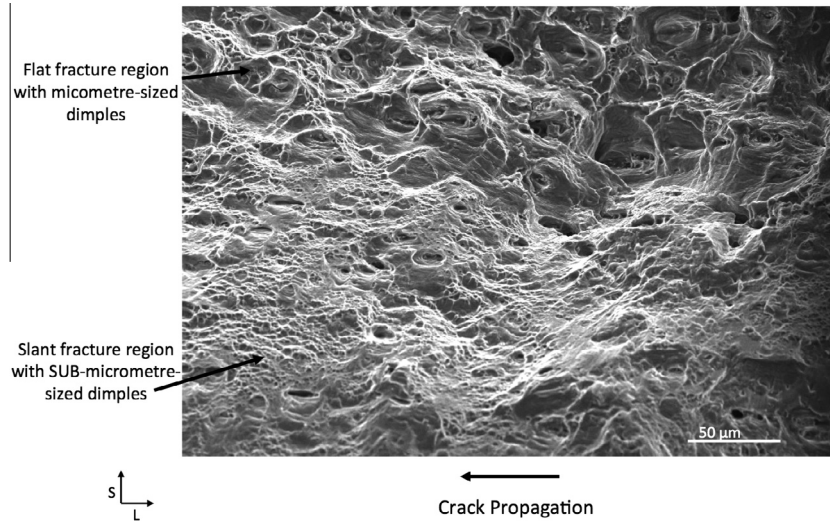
Fracture surface of the flat-notched specimen, showing the flat fracture surface covered by large dimples and the slant area mostly covered by small dimples.
